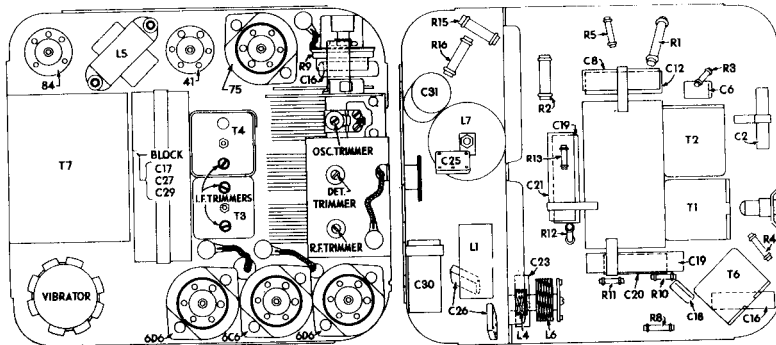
PARTS LAYOUT - TOP VIEW CADILLAC 1936 STANDARD RADIO MODEL 6R
